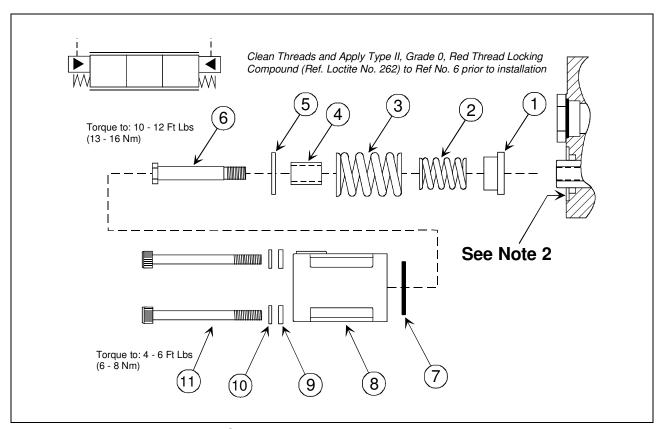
'HR' Hydraulic Remote Spool Actuator (Positioner End)
